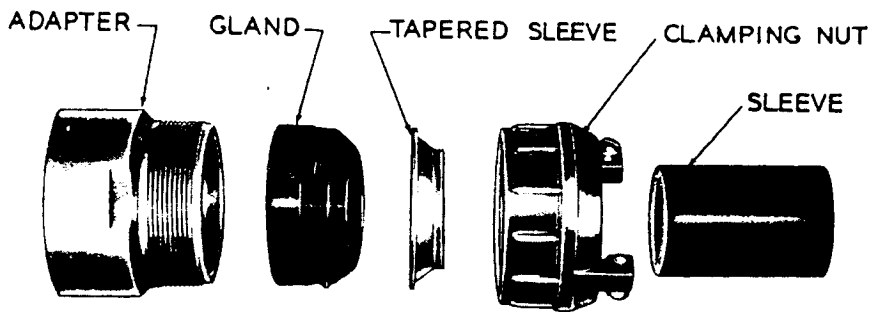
10-113138 Adapter and MS3057B cable clamp. Left hand thread at connector end of adapter and right hand thread at cable end.
